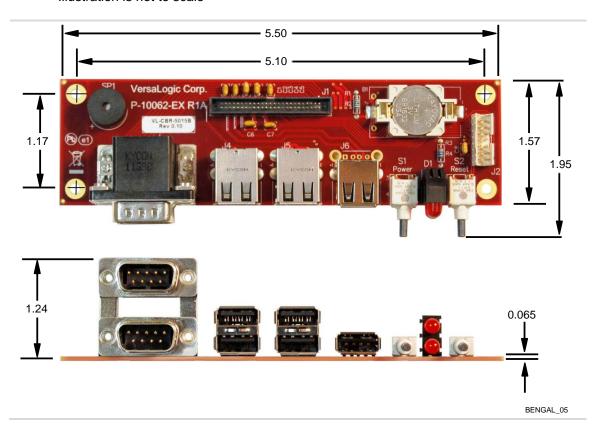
VL-CBR-5015 Dimensions and Mounting Holes
